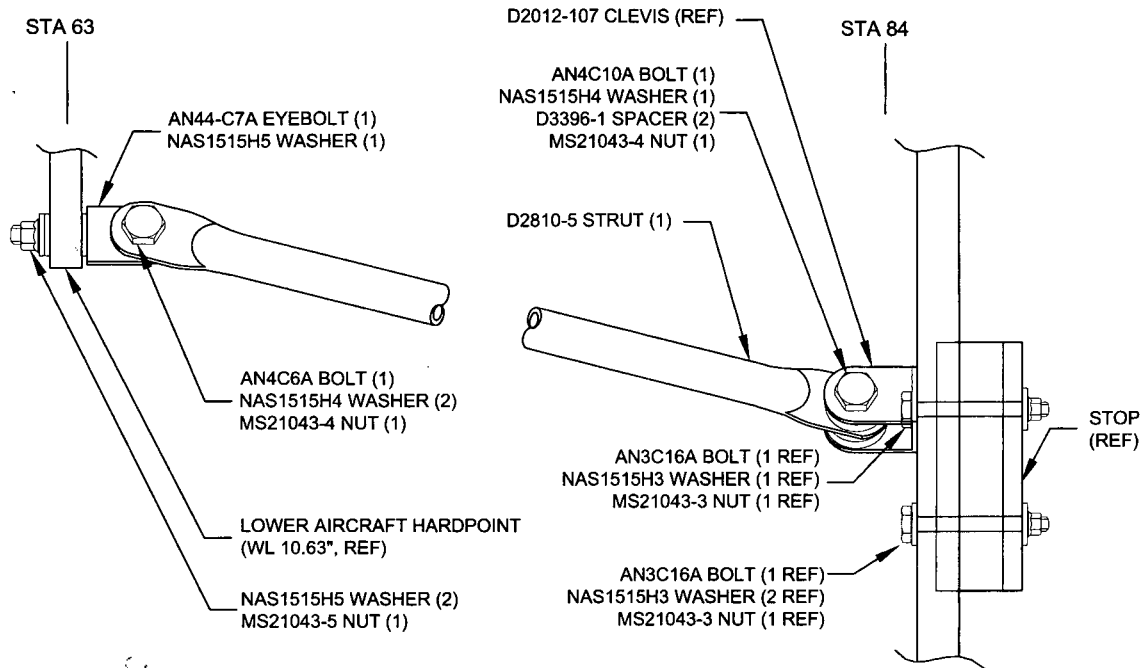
Strut Detail for D412-630-033/-034 Heli-Access-Step™ Installation
